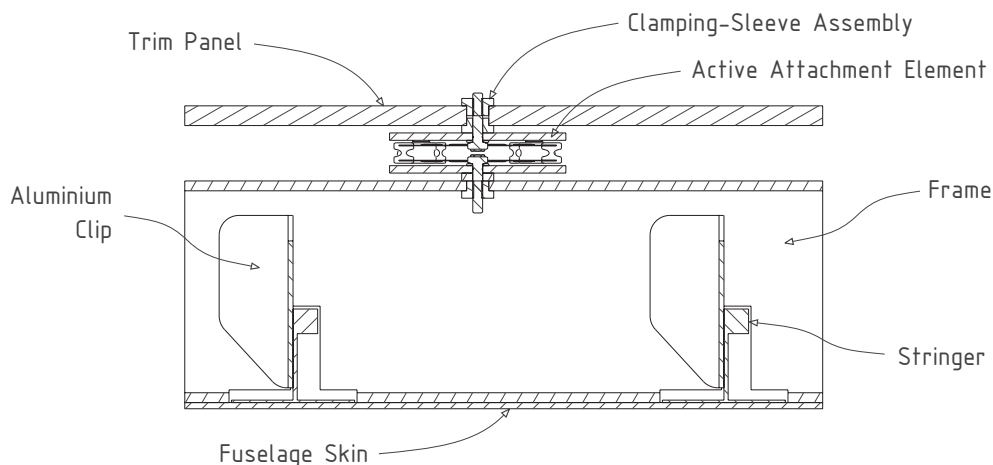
Detail of actuator mounting between fuselage frame and trim panel
